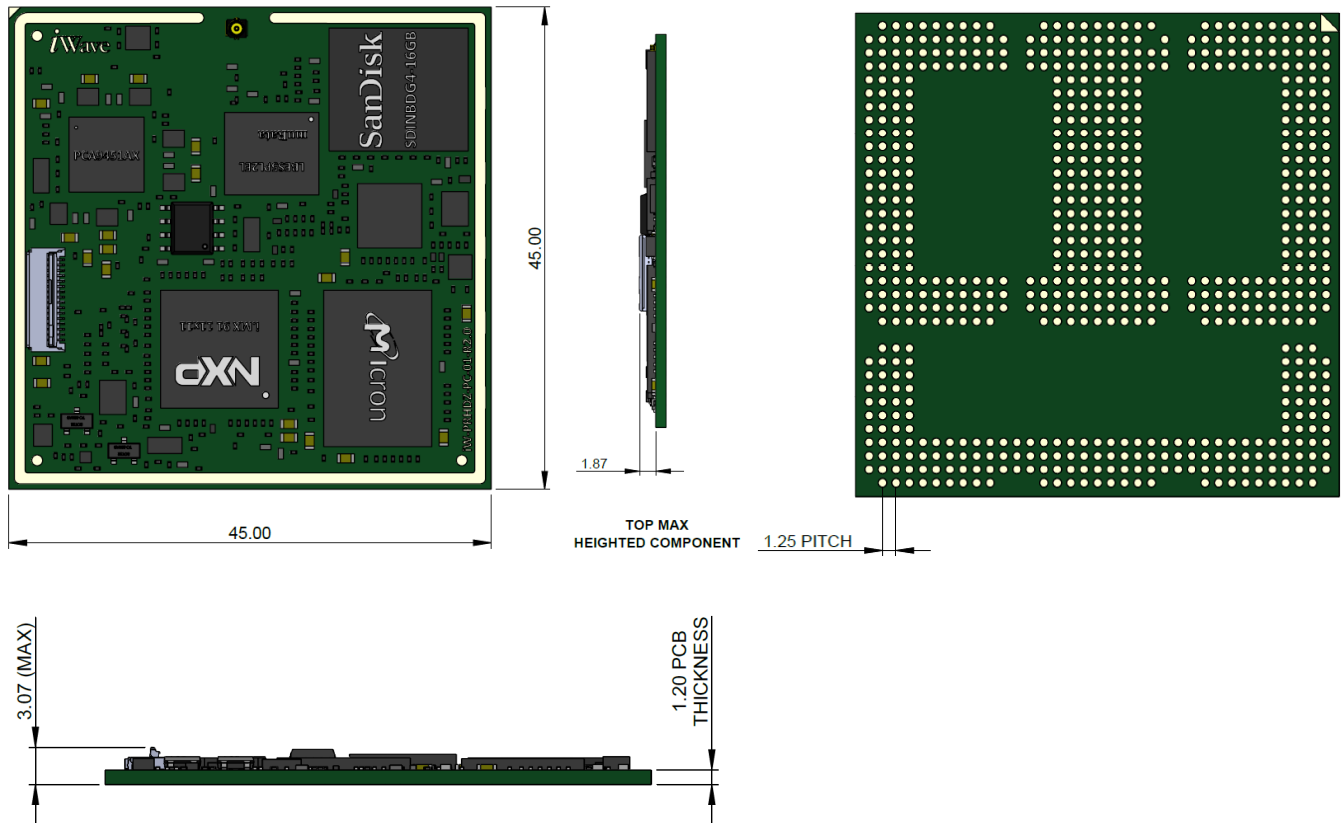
Mechanical dimension of i.MX 93 or i.MX 91 OSM LGA Module
